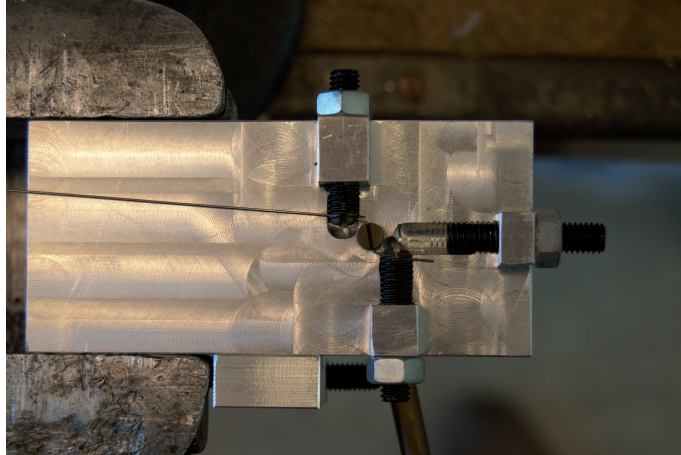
Bending device used to have a repeatable shape of the prongs.
